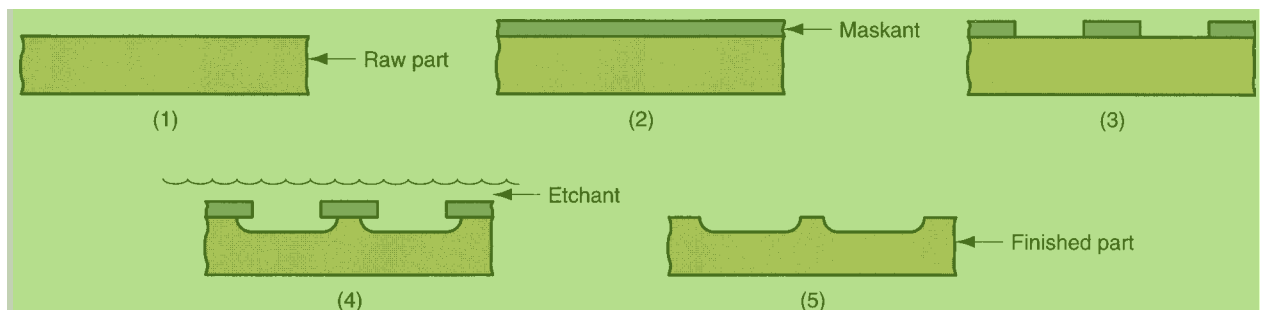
Sequence of processing steps in chemical milling: (1) clean raw part, (2) apply maskant, (3) scribe, cut, and peel the maskant from areas to be etched, (4) etch, and (5) remove maskant and clean to yield finished part.
